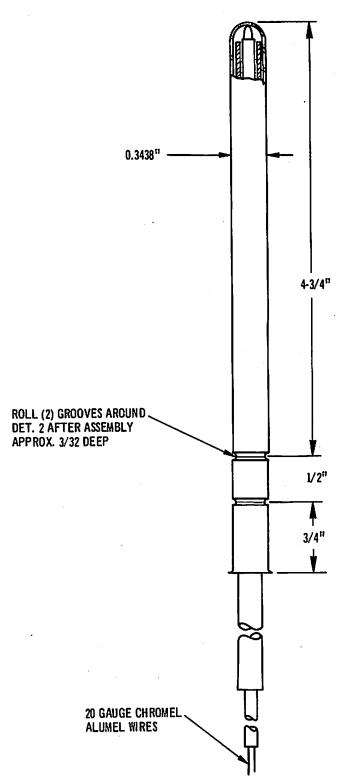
Figure 6.9-7 Special Thermocouple Assembly [Vol. II, Chapter 6, p.6.9-11]
